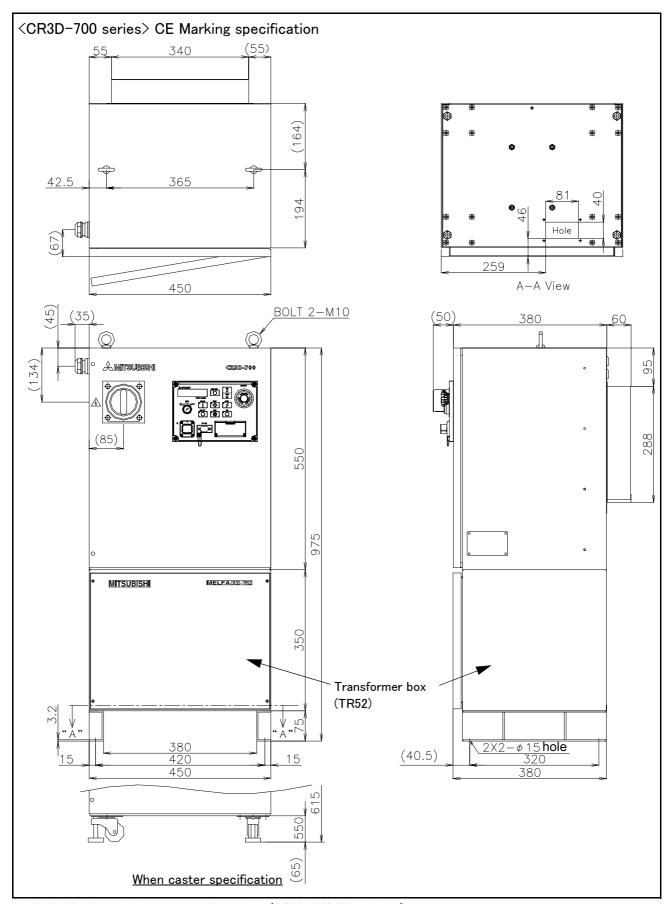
Outside dimensions of controller(CR3D-700 CE Marking)
